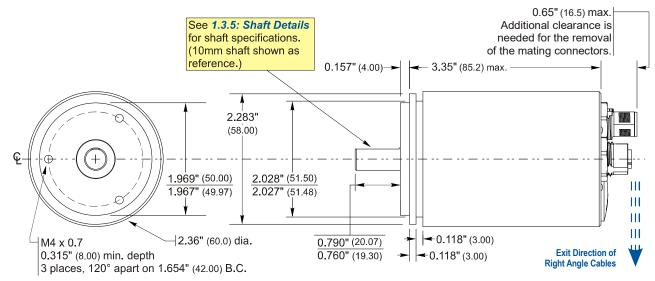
Servo Mount, Side Connector Outline Drawing
